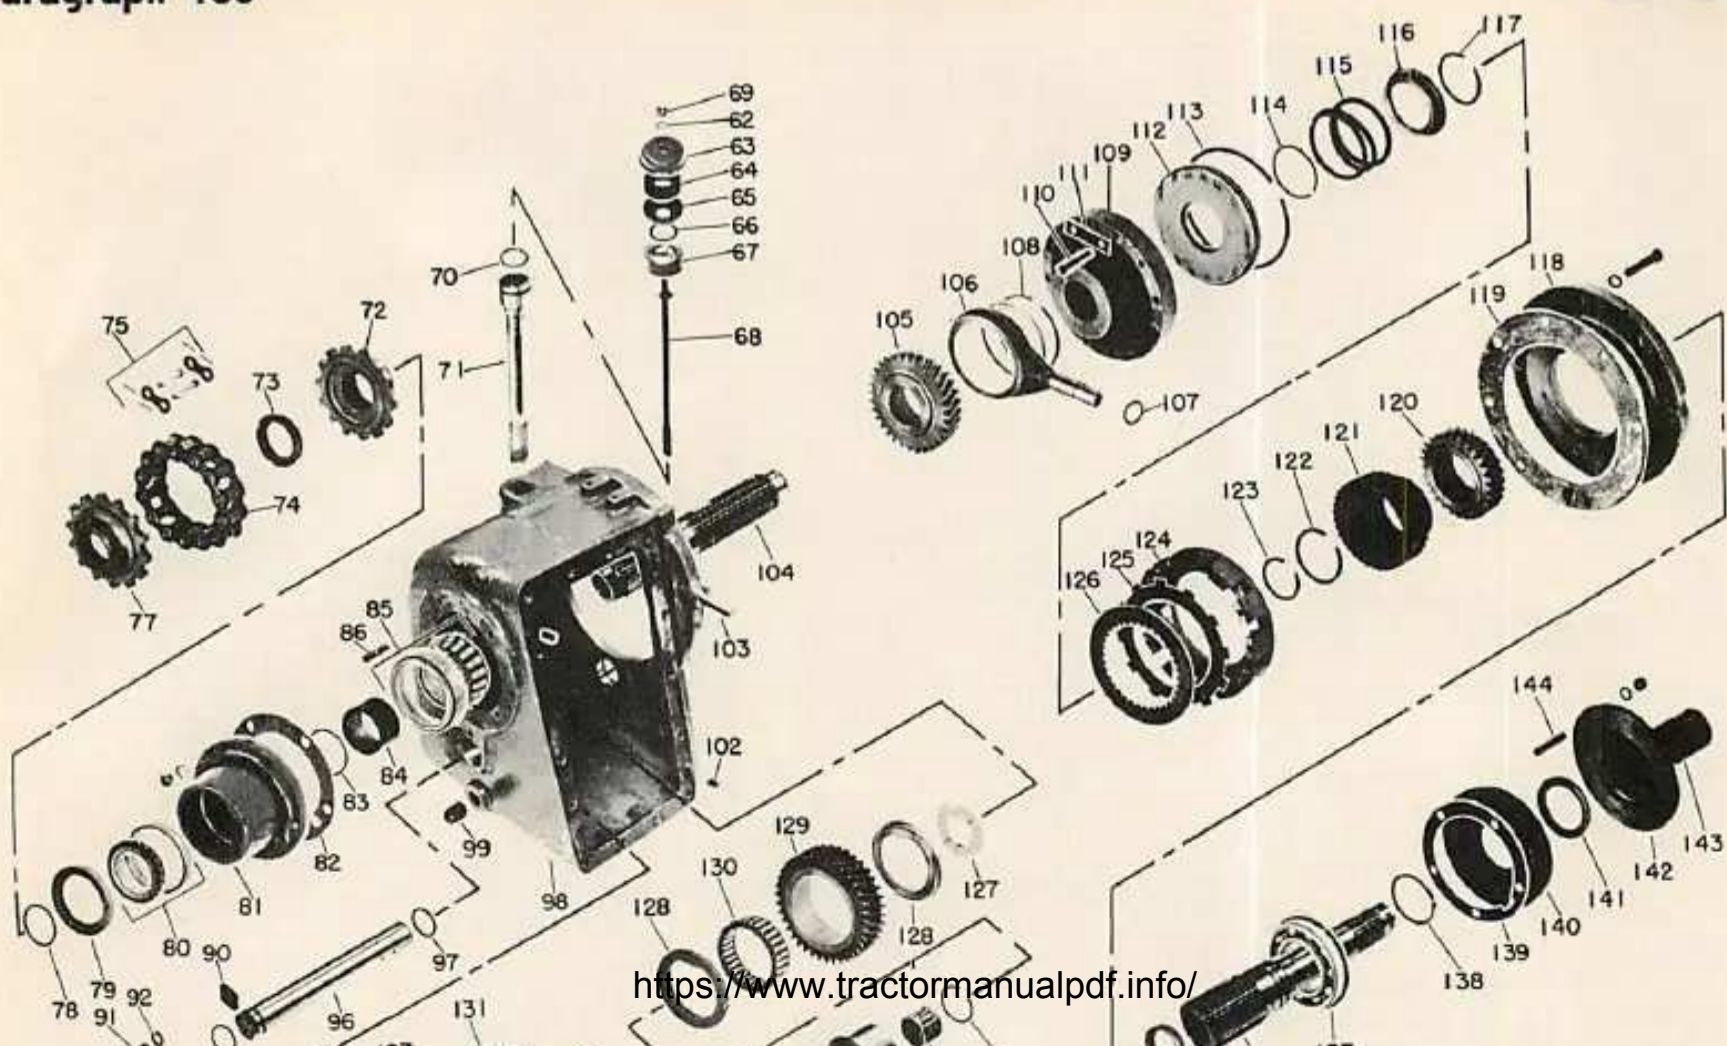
Exploded view of the latest Hydra-Power drive unit. Earlier units did not use bearing spacer (84), clutch gear bearings (128) were retained by snap rings (not shown) and pump was driven by double gear (131) (see Fig. O113) instead of gear integral with countershaft (134). Refer to text for difference in service procedure on early and late output shaft assemblies.
